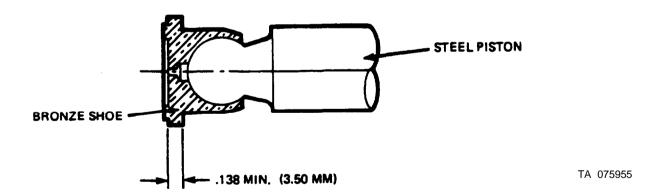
Piston Shoe Rework Tolerance
